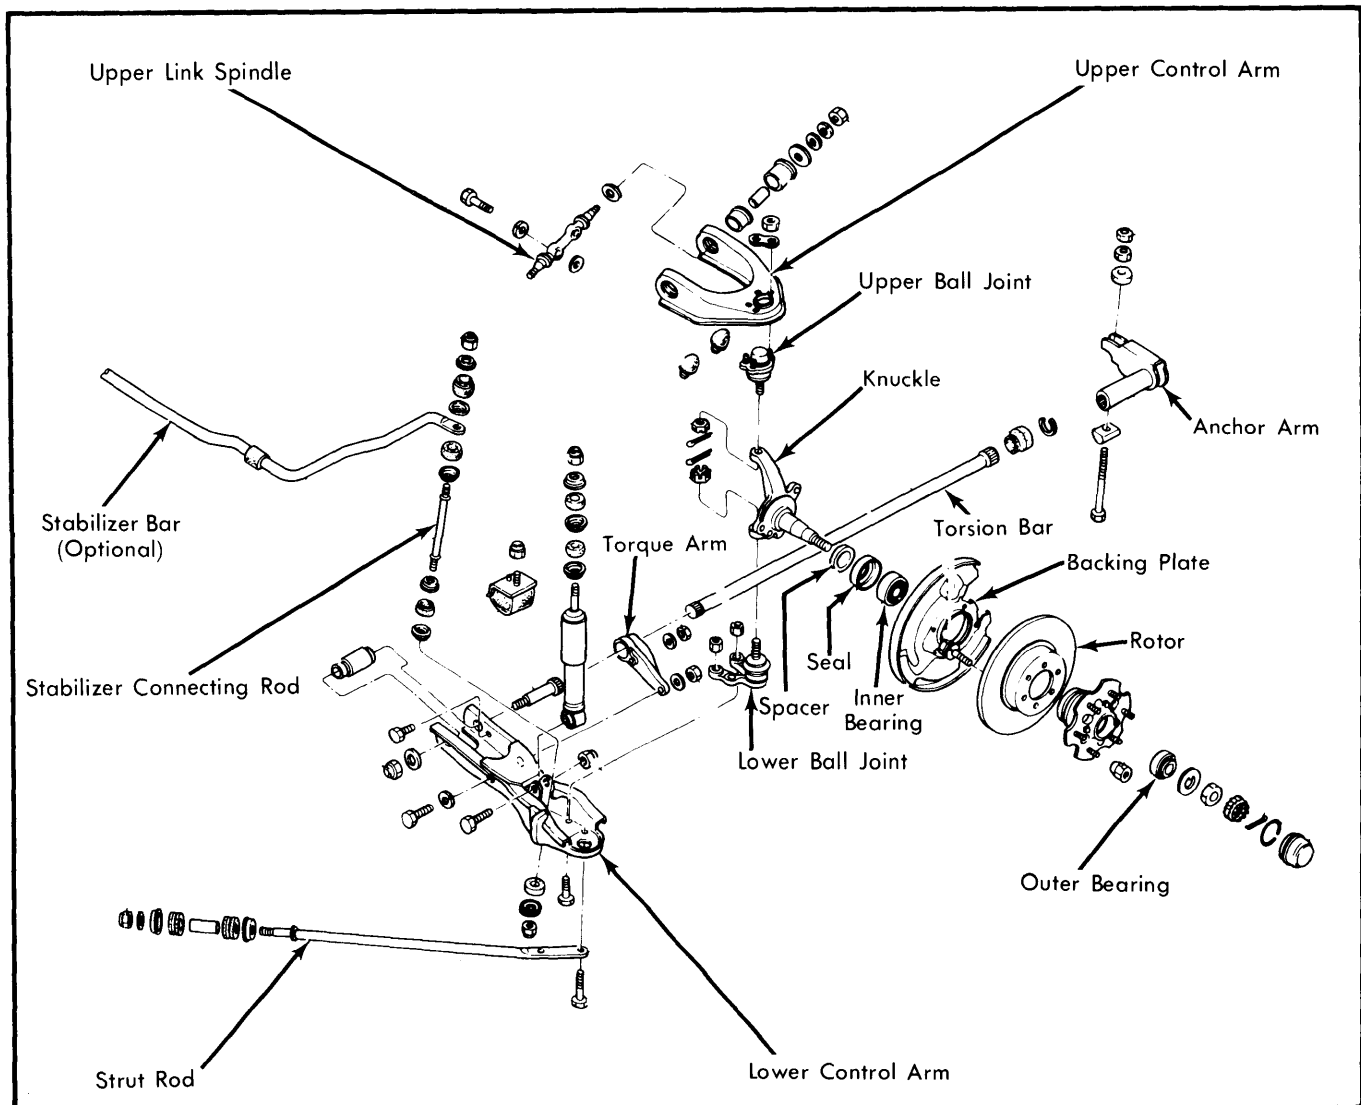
Exploded View of Datsun Pickup Front Suspension
